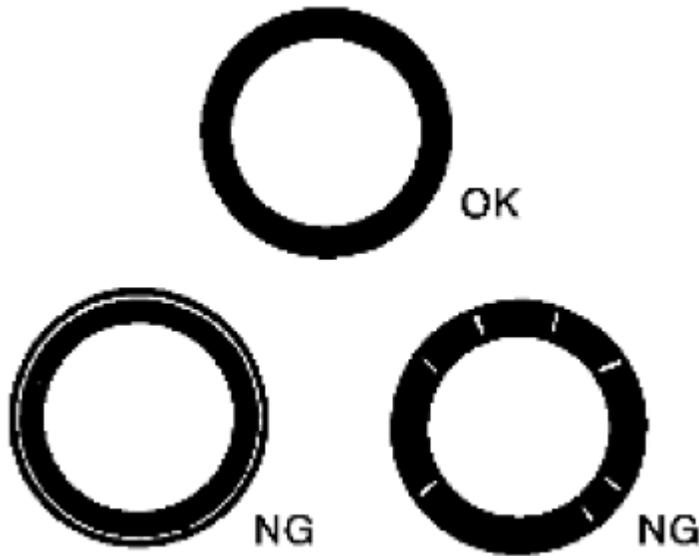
Identifying Correct And Incorrect Valve Seat Contact
